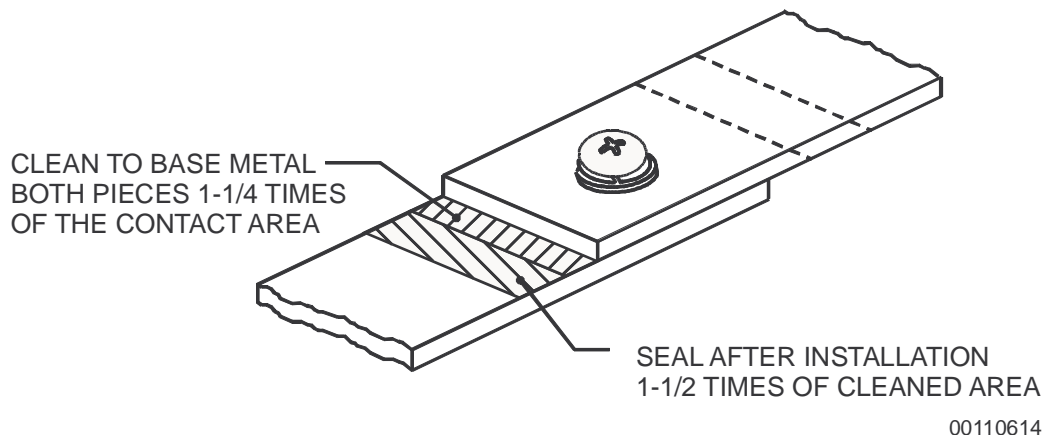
Typical Bonding Connection for Bolted Structural Joints
